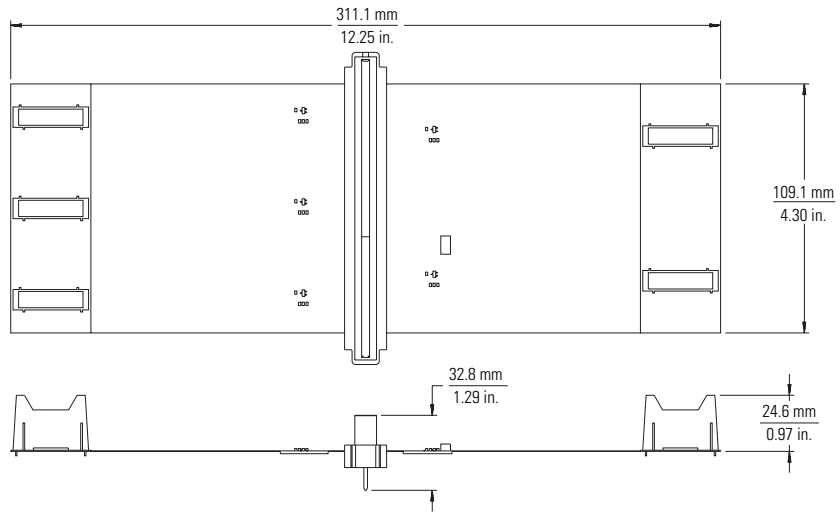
E2492B SC 242 (Slot 1) Probe Adapter Mechanical Dimensions
